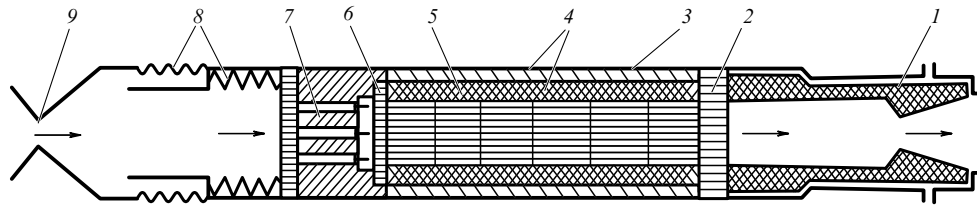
Principal HRA scheme: (1) nozzle unit; (2) bearing grid; (3) beryllium-steel bilayer housing; (4) heat-insulating packet; (5) heating units; (6) input grid; (7) end reflector; (8) thermal-expansion compensation unit; (9) throttle [4].
